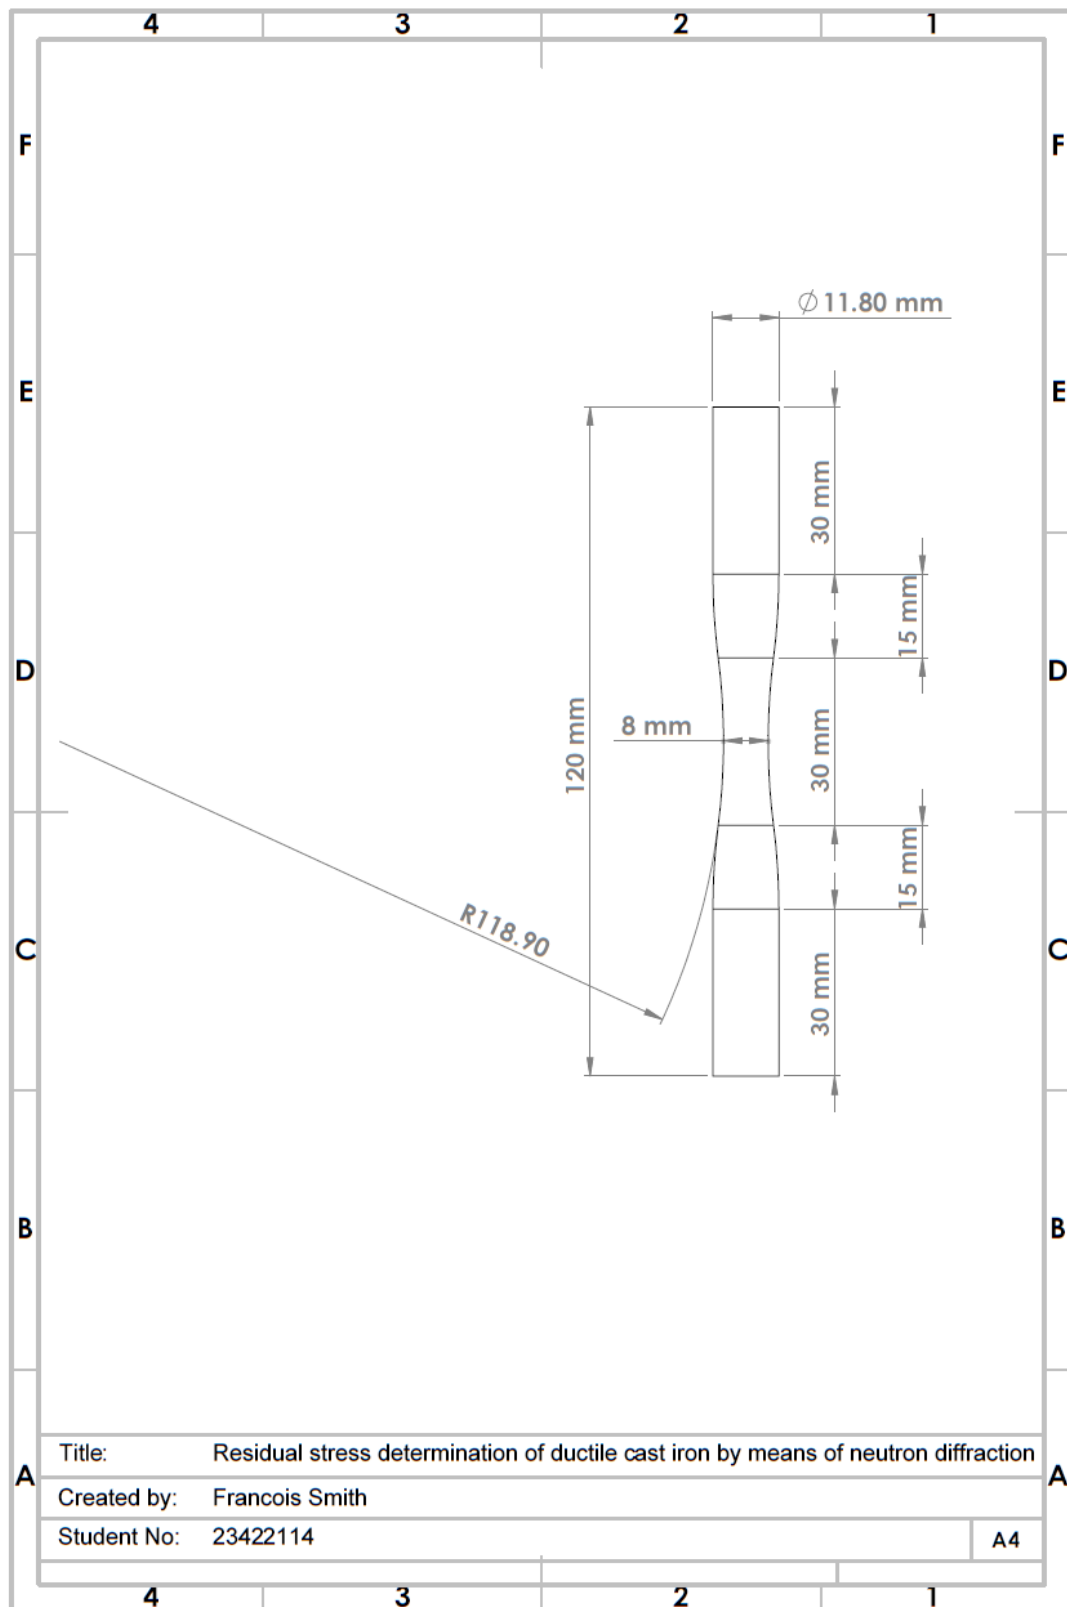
Detail drawing and measurements of the machined samples - T2B1(V4), T2B2(V4) and T2B3(V4)
